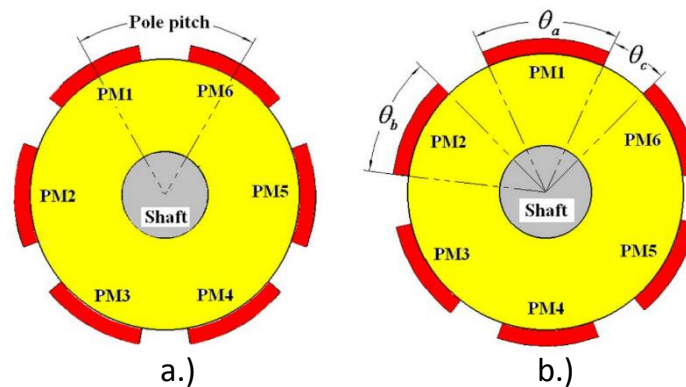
Cross section of rotor of surface mounted PMSM. (a) Uniform magnet rotor. (b) Different magnet widths method.
